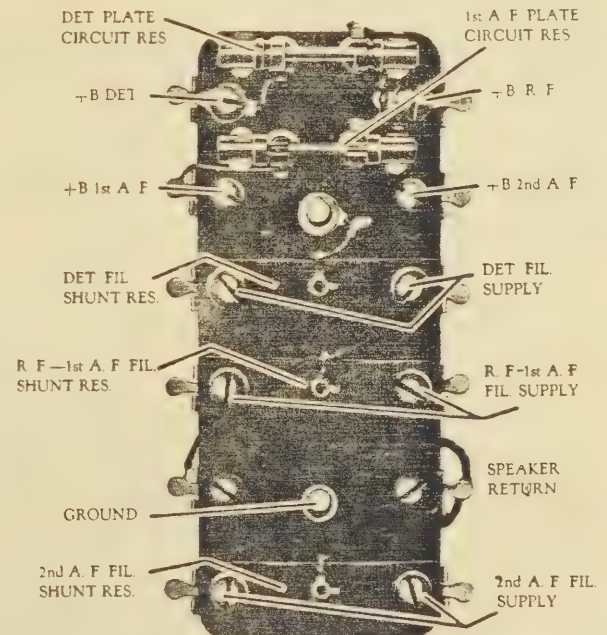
BOTTOM VIEW OF PANEL ASSEMBLY USED IN POWER UNIT OF MODELS 40, 42, 44 AND 52
